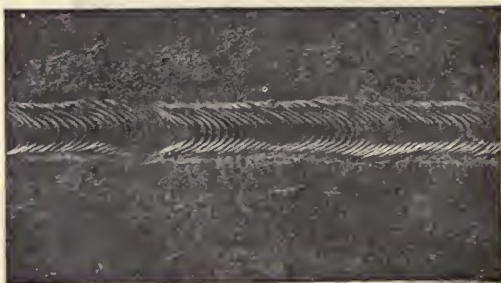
Photograph of weld obtained on a Trambouze machine, actual size (plates  $\frac{3}{8}$  in. thick).
